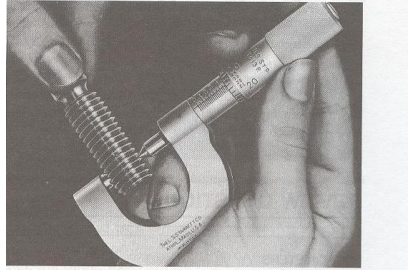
A screw thread micrometer measures the pitch diameter of a thread. (Courtesy The L. S. Starrett Company.)
